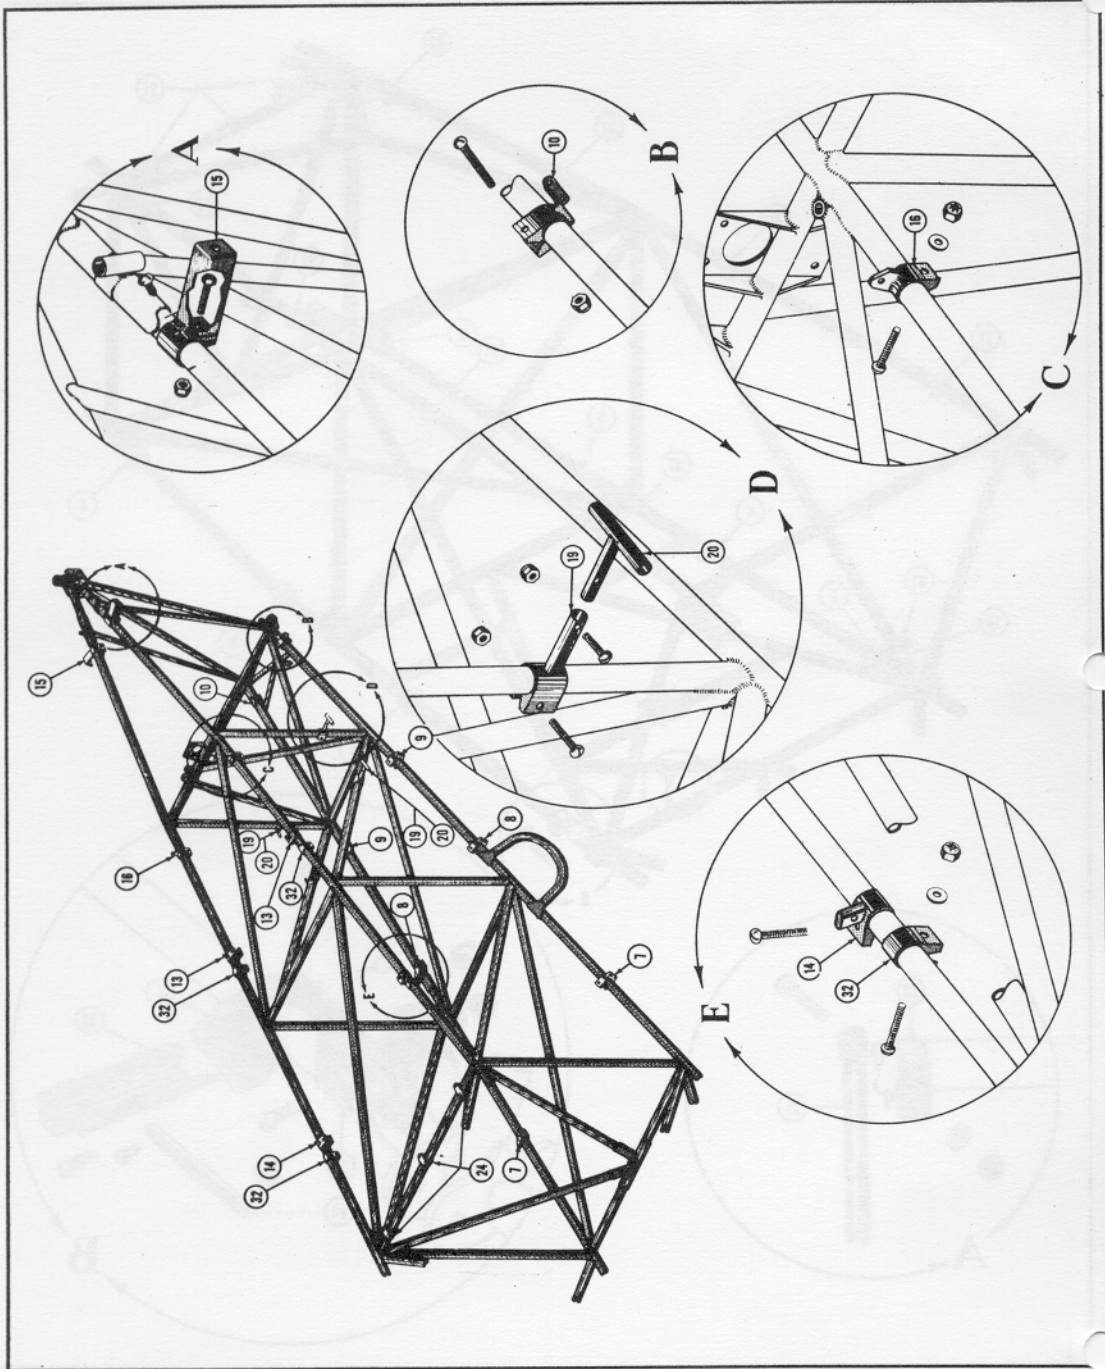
Fuselage Fairing and Covering Installation (Sheet 4 of 4 sheets)
